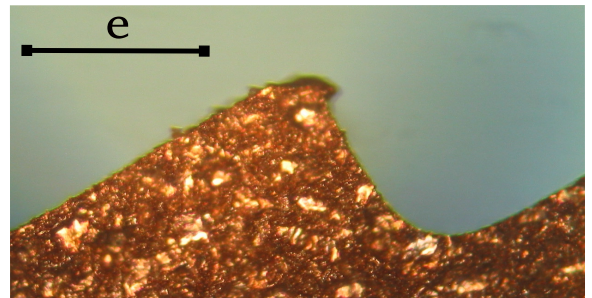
Milled aluminium tooth,  $e = 0.4$  mm
